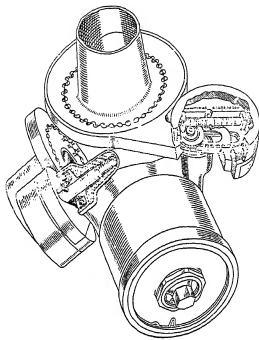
Skeleton assembly of counterweight brackets and blade bushings to show basic and counterweight settings in situ
